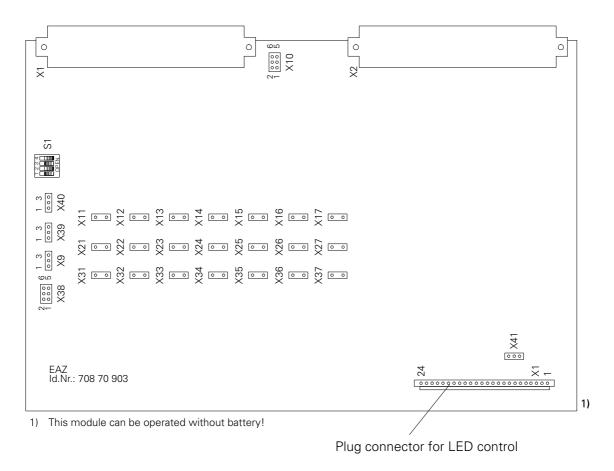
Location of the jumpers on the module EAZ1 (master unit)
